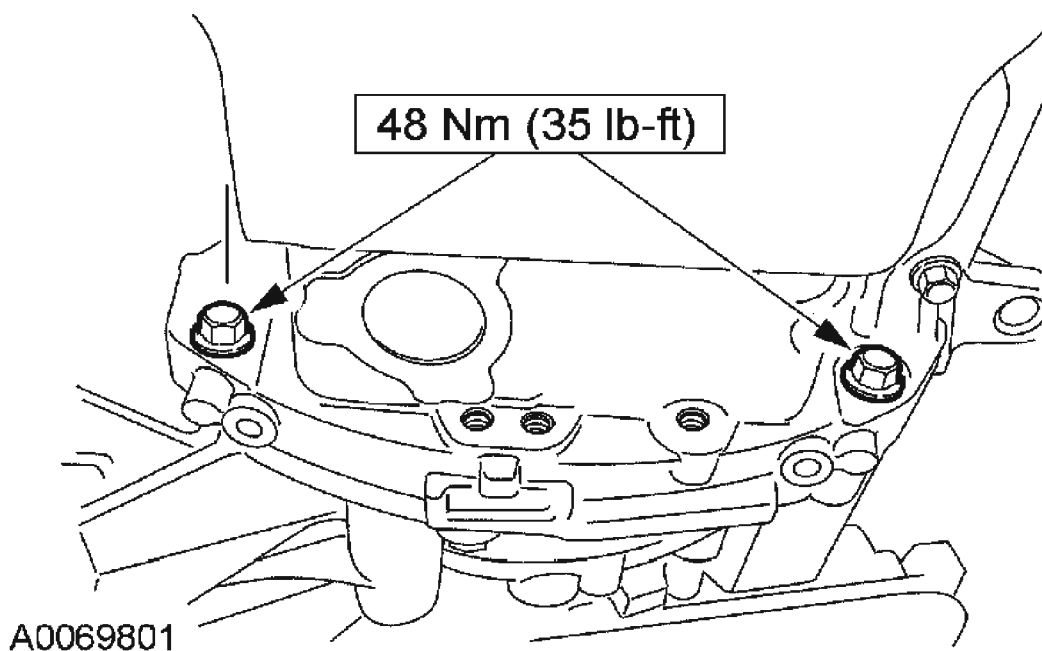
Installing Remaining Engine-To-Bell Housing Bolts
